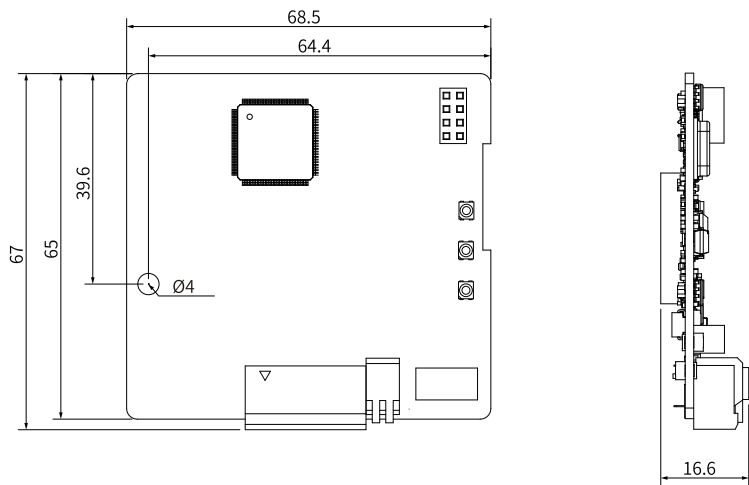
MD580-SI-CAN1 card dimensions (unit: mm)
